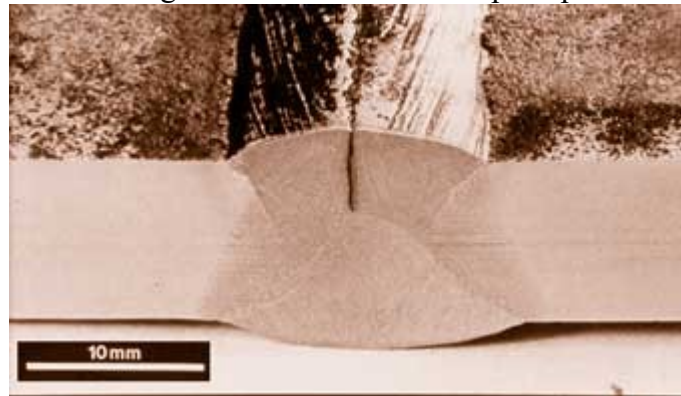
Propagation of solidification crack. (The welding institute 2010.)
